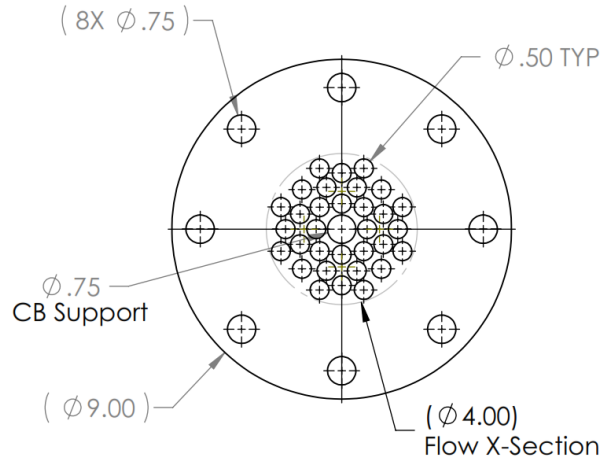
Drawing of blockage plate hole pattern, Item 1 in Figure 3.1, manufactured from a 4" \varnothing schedule 40 blind pipe flange. Hole pattern results in an area blockage of $\approx 53\%$.
